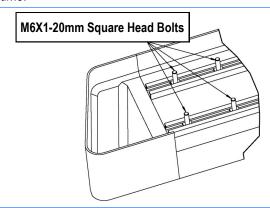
Attach Support Bracket To Pinch Weld (Passenger Front Mounting Bracket)
